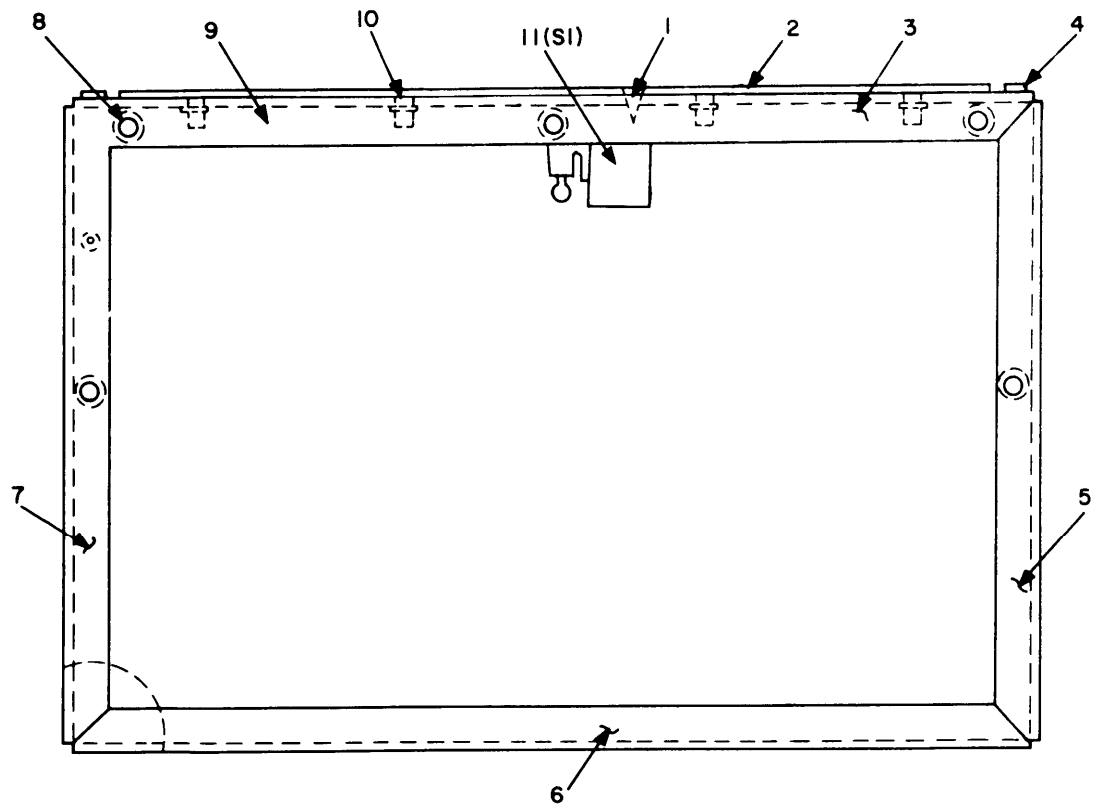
Power supply PP-4763/GRC and PP-4763A/GRC, cover assembly.
